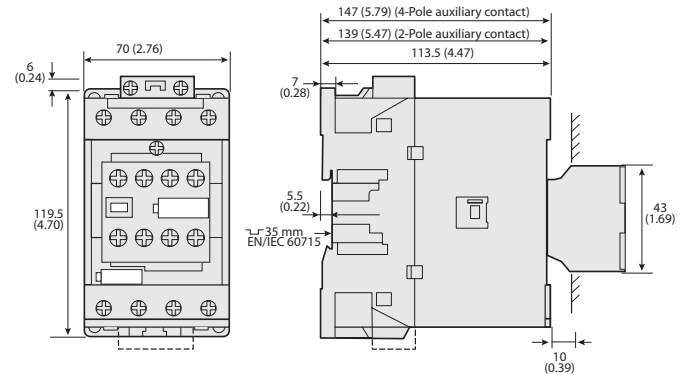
100-E40...100-E52 4-Pole Contactors with Side-mounted Auxiliary Contact
